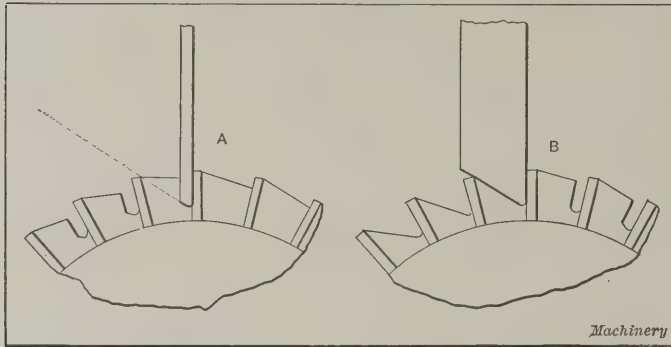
The Two Steps taken in Re-cutting Milling Cutters by Grinding
